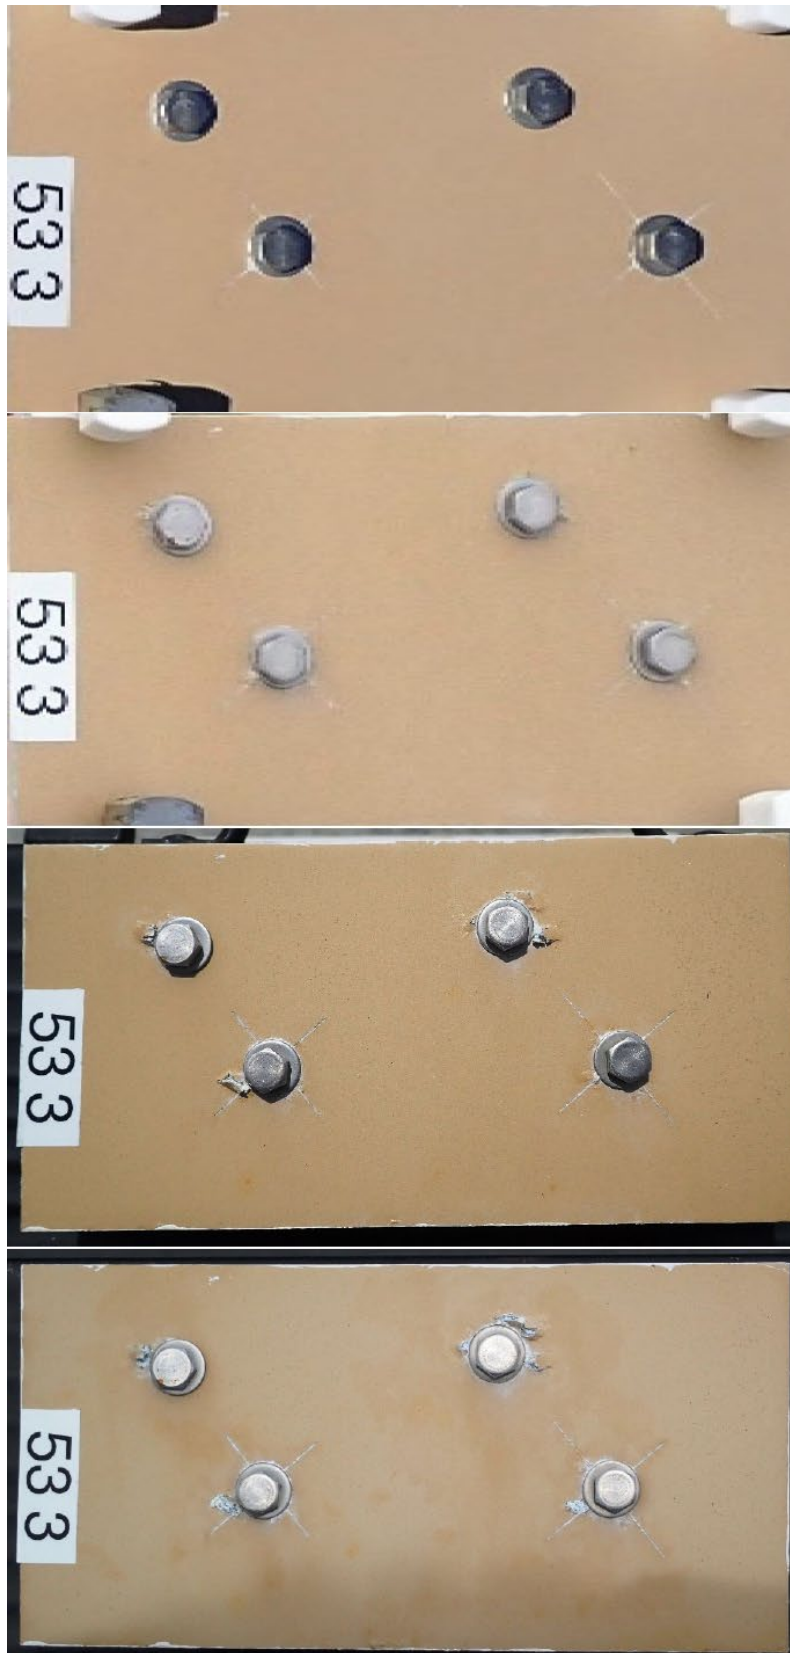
Panel 53-3 top-bottom: 3-, 6-, 9-, and 12-month inspection images
